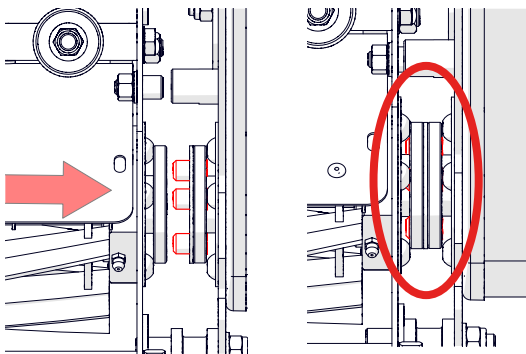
D - Lower the new cassette in and slide across, engaging with three pins.
